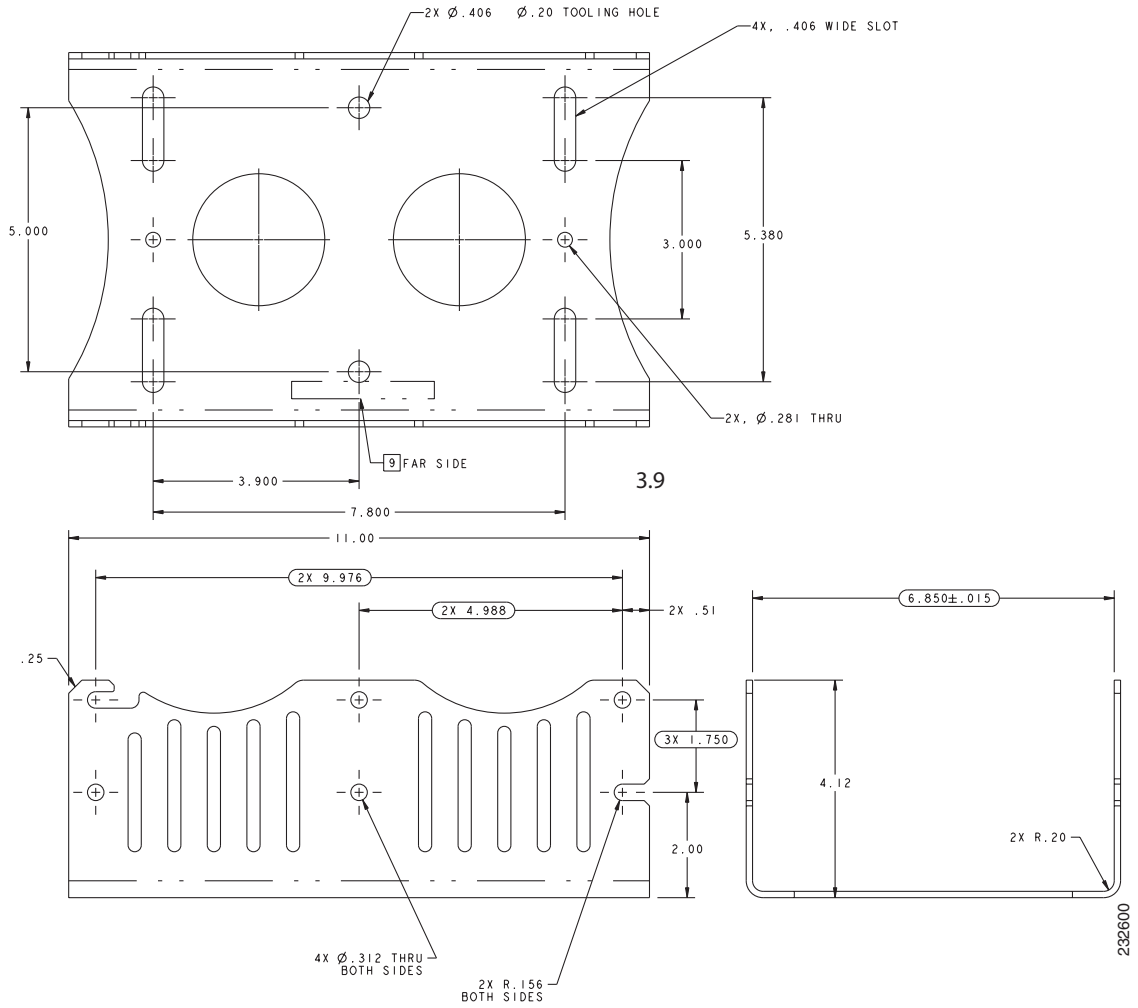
shows the Cisco 3230 Rugged Enclosure mounting bracket.
